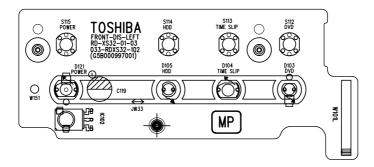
EU03B Front (L) PC Broad (Top side)
